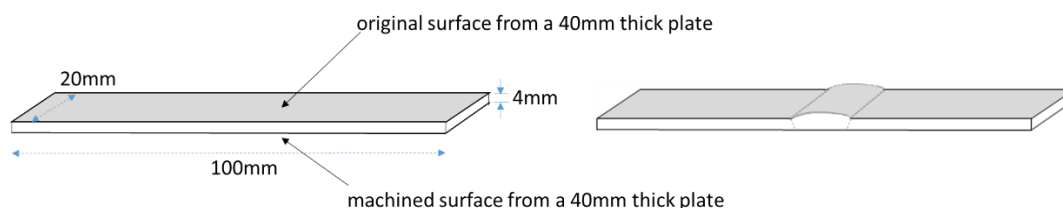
Four-point bend specimens (parent specimen and as-welded specimen)
